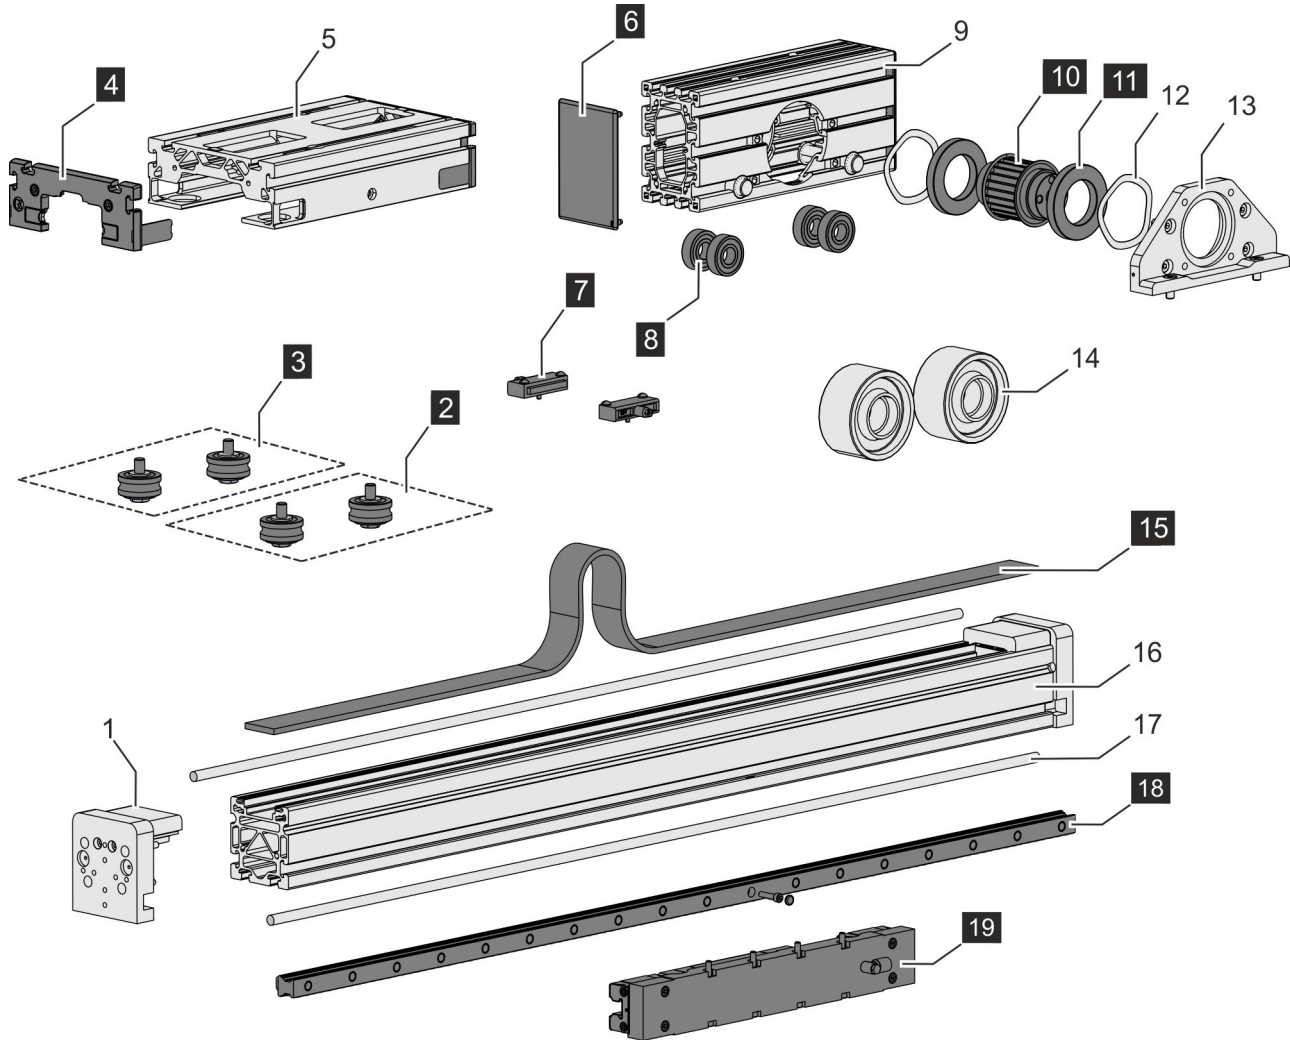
RK MonoLine MT Safelock linear unit – exploded view
